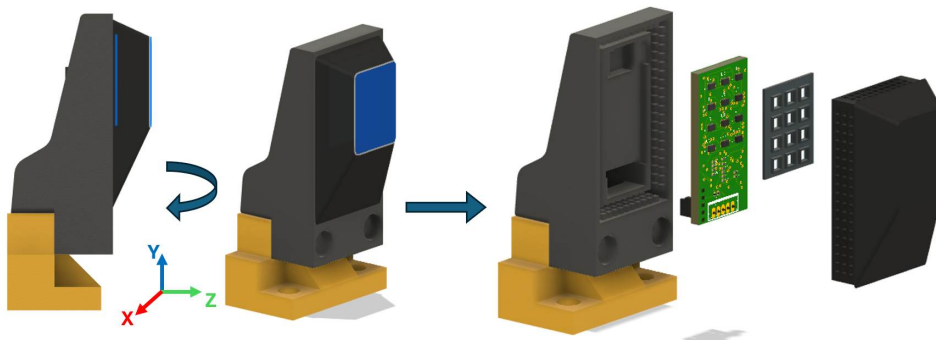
CAD of an assembled sensor (left) and exploded view with all components (right)
